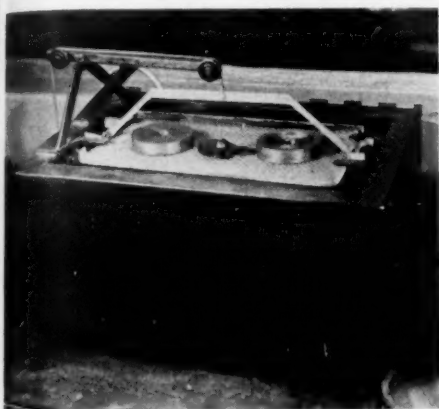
Heating Vat, Showing Movable Tray With Molding Die and a Distorted Disc
